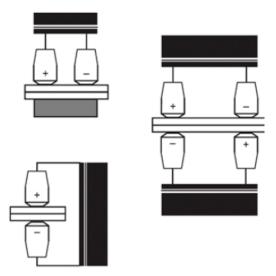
Different kinds of transformer solutions used in resistance welding. (*Ruukki*, 2009)
